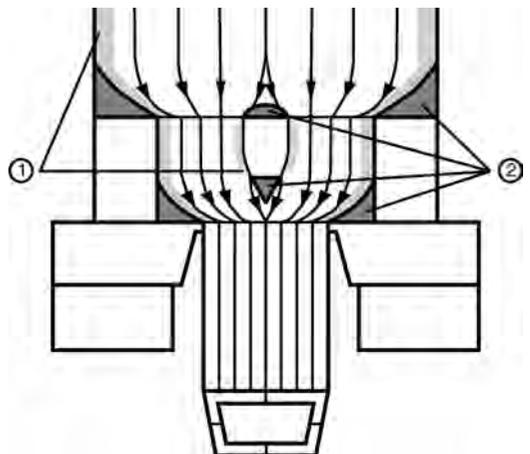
Laminar material flow [Ake 92]. 1, adhesive friction; 2, dead metal zone
